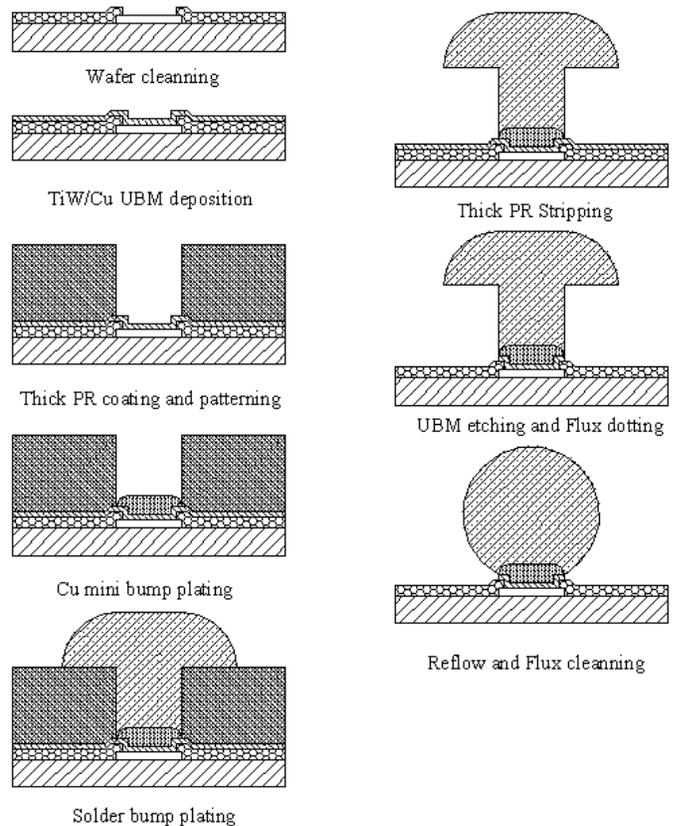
Schematic diagram of solder bumping process using electroplating method.
